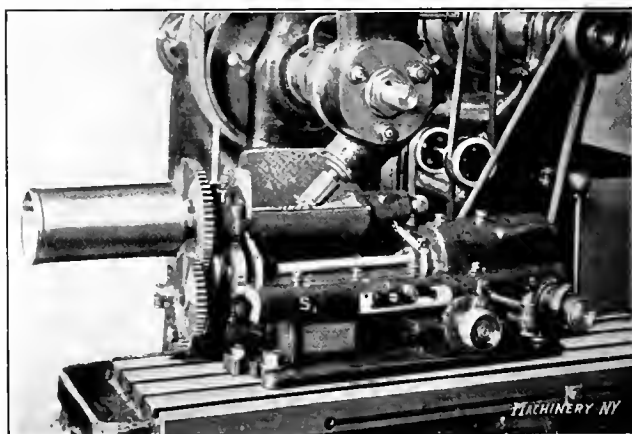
Milling the Spindle Driving Worm in a Completely Automatic Attachment for the Plain Milling Machine
